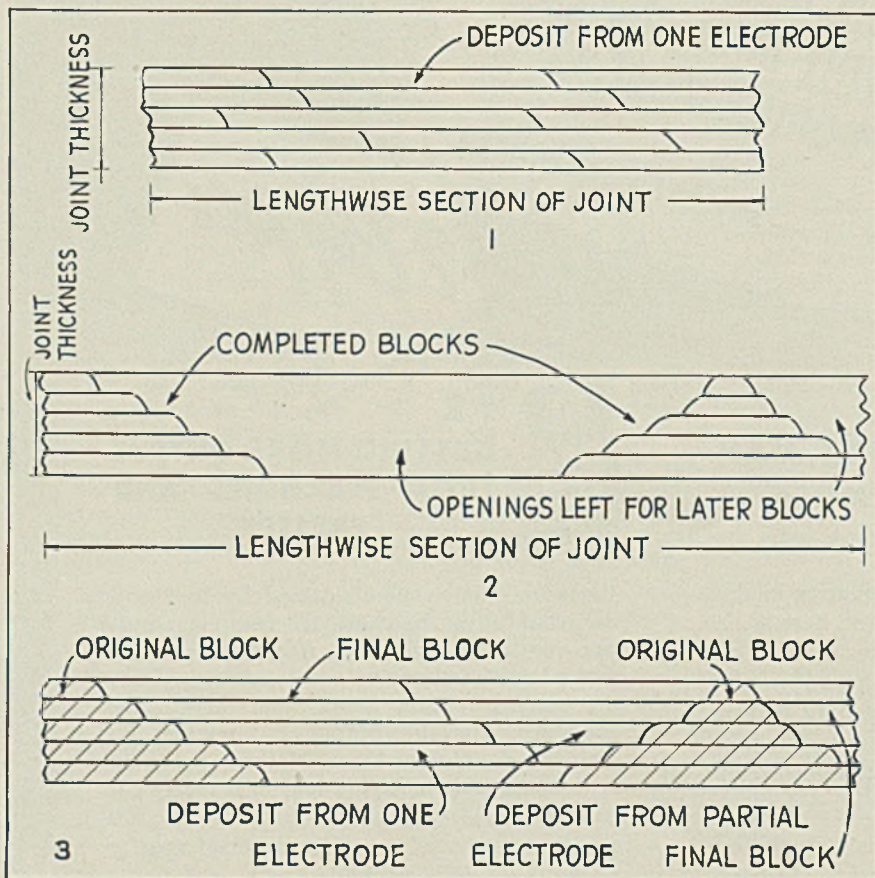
Normal method of making a 5-layer weld. Fig. 2—Scheme for making a 5-layer block weld. This is starting procedure. Fig. 3—Block weld of Fig. 2 is completed in this manner
